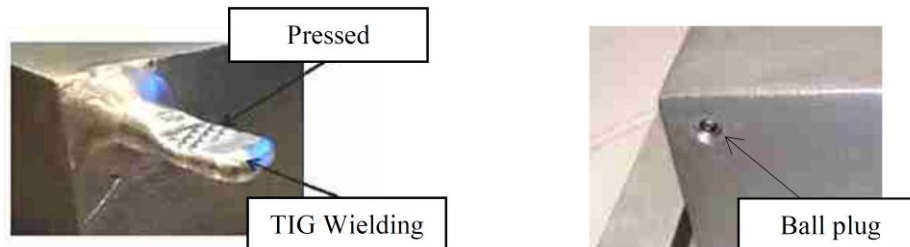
Sealing concepts in order to capsule a PCM void, where the container is made from aluminium. The two sealing variants consist of a pressed queusots with a welded nozzle exit (left) and a ball plug inlet (right) which provides a form-fit seal [DUD-19]
